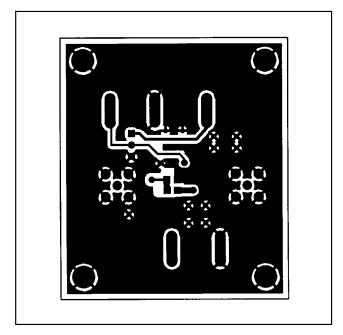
MAX477 EV Kit PC Board Layout—Solder Side
